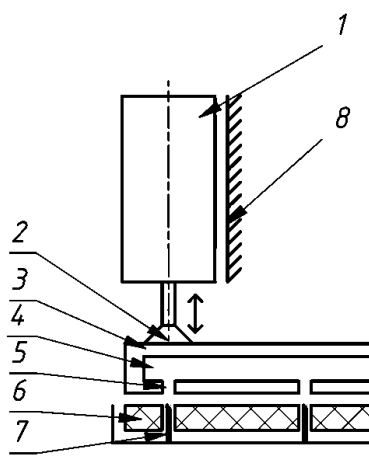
Technological scheme of the pneumatic drive of a flat die-cutting press
